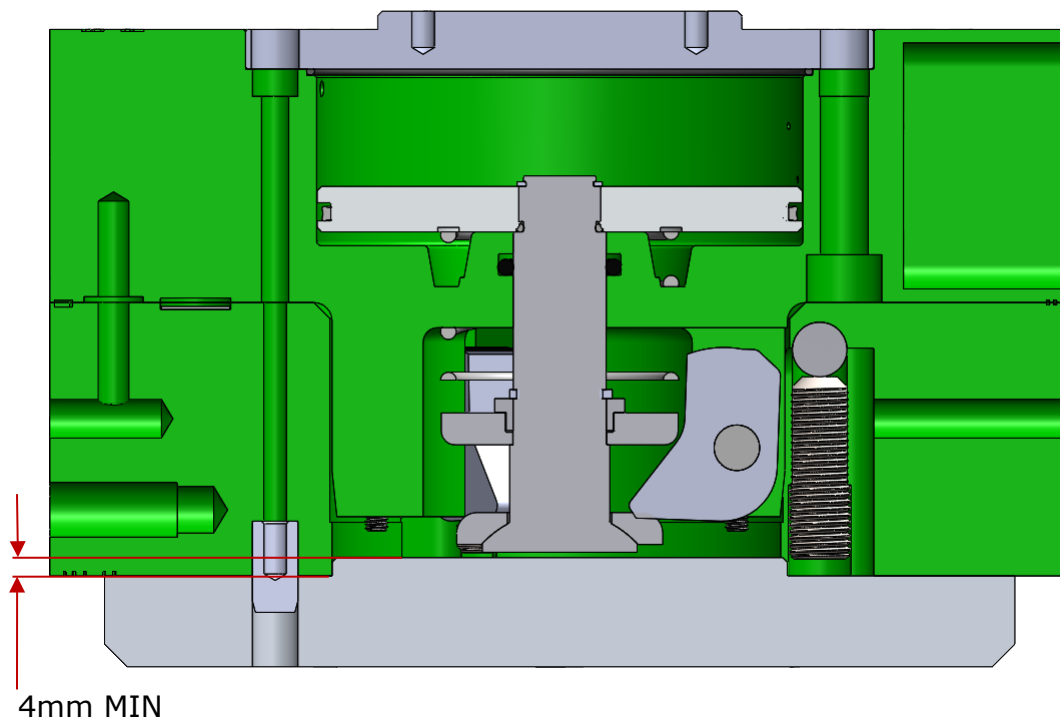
E125 Tool Side and Tool Plate Installation
